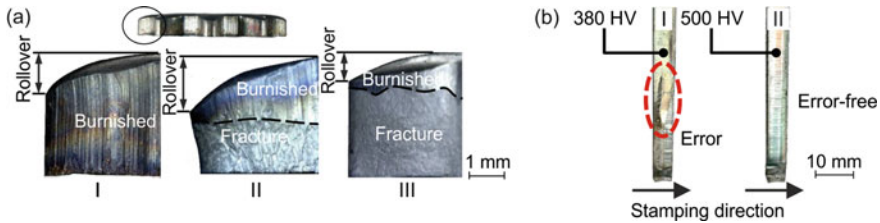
Heat-assisted shear cutting of functional parts: a Geometrical aspect of gearing part (I: hot, 1% clearance, II: hot, 10% clearance, III: cold, 10% clearance) [3], b Surface and mechanical properties of straight cut (I: Stamping at room temperature, ferrite–pearlite microstructure, II: Stamping at elevated temperatures after austenitization)
